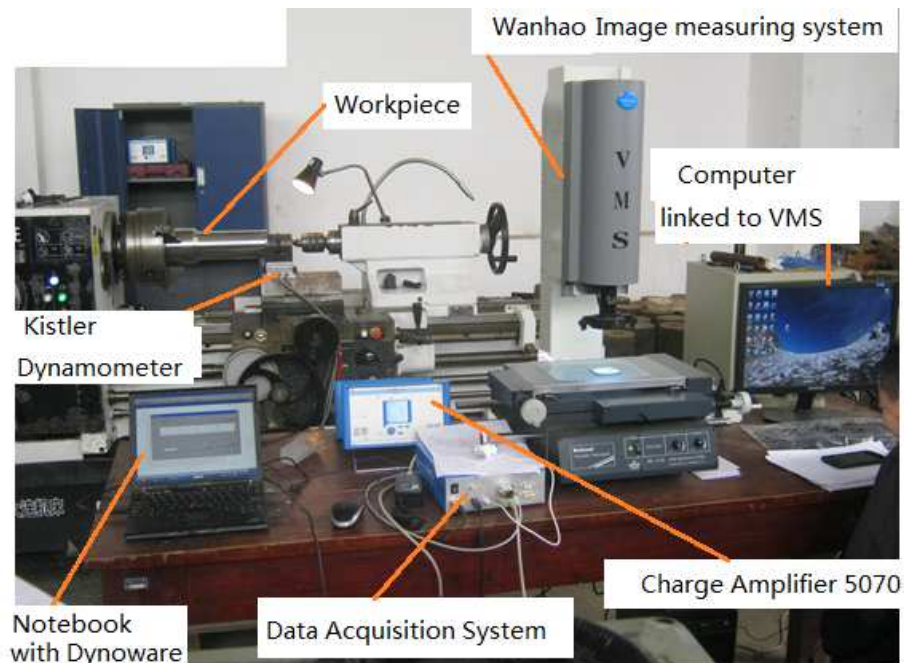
layout of the equipment for force measurement and tool wear measurement.
